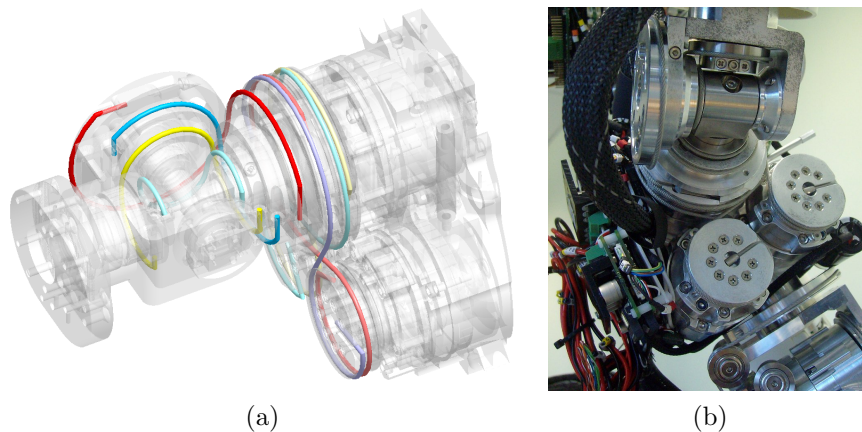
The shoulder joint. The figure shows a CAD view of the shoulder joint mechanism with a highlight of the cable transmission system (a). The figure also shows a photo of a bottom view of the shoulder joint (b).
